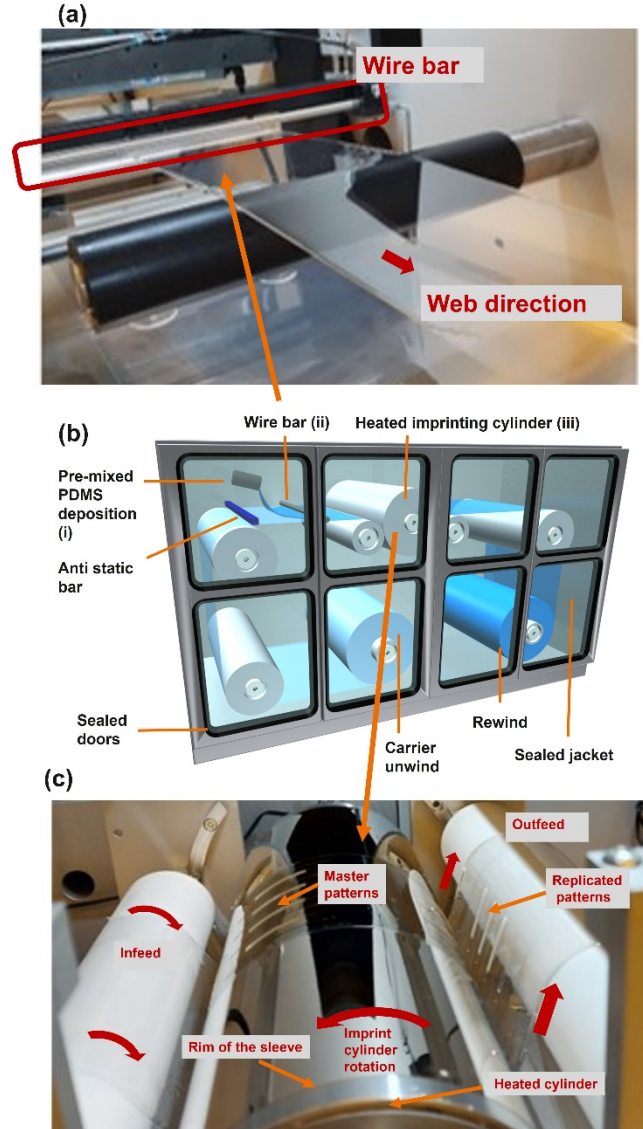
(a) Wire bar levelling of deposited silicone. (b) 3D illustration of imprinting in sealed R2R machine. (c) Thermal cure R2R imprinting.
